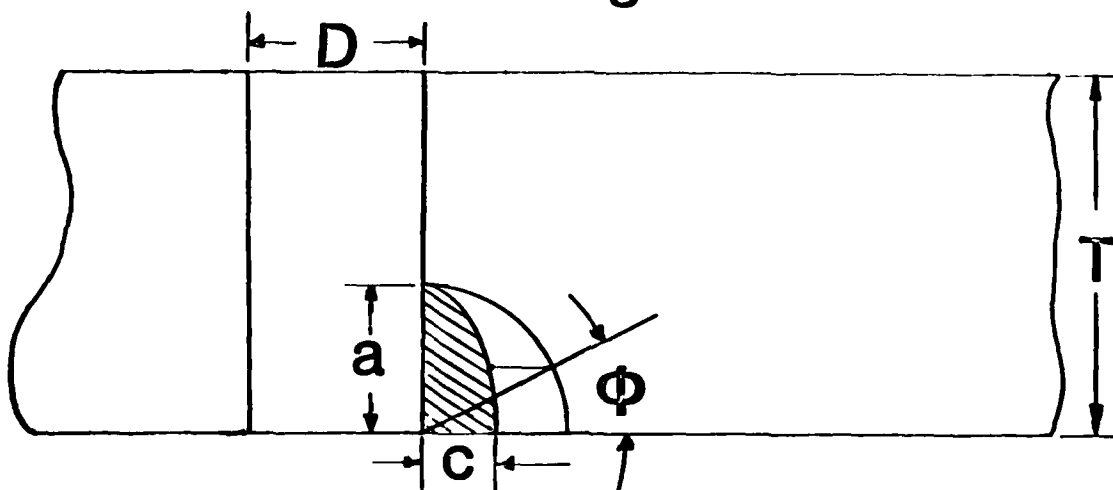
Schematic drawing of crack plane showing location of single and symmetric corner cracks located at bore of hole.
